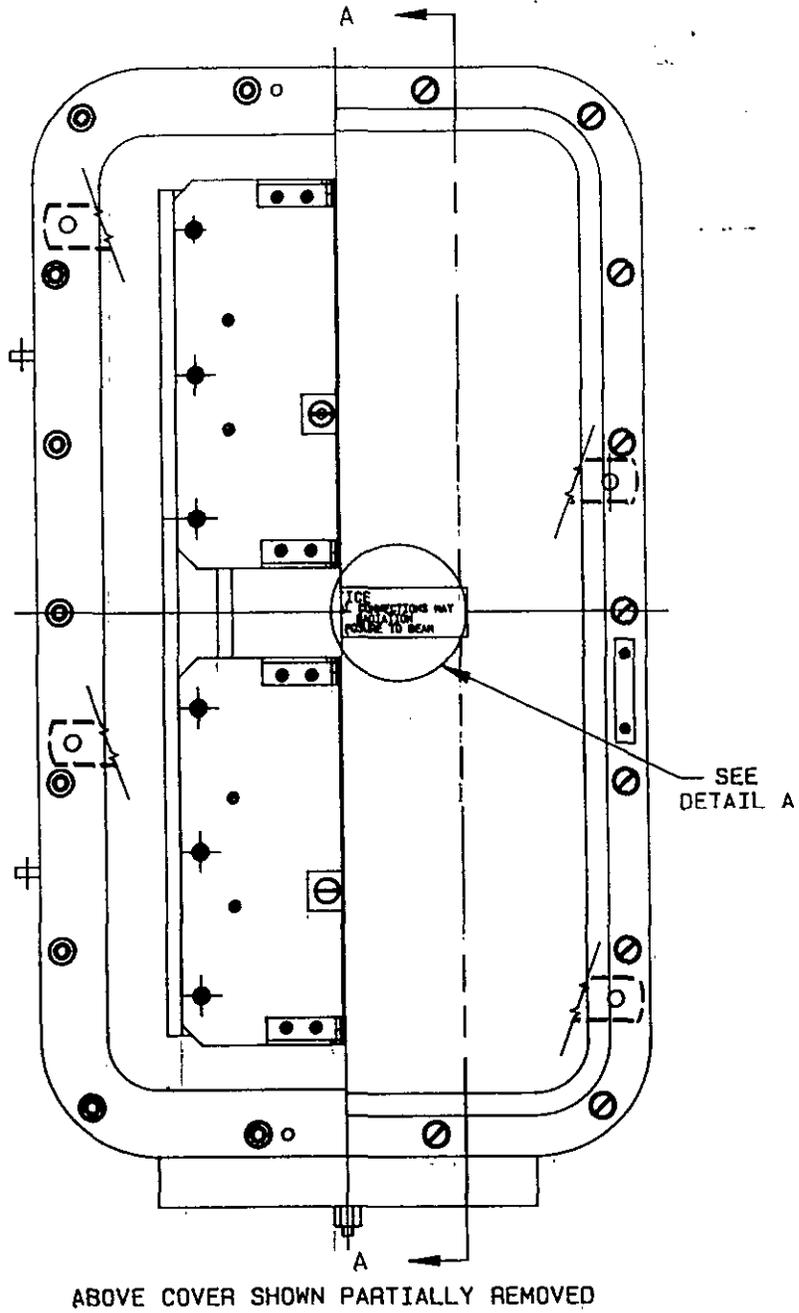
Patch panel kits M24728/1-002 installed in an enclosure assembly, M24728/2-001.
